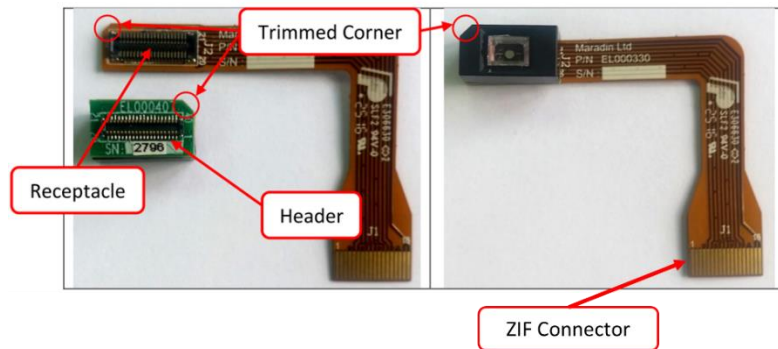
FPC connector to attach the MEMS micromirror to the control board and proper assembly. The trimming is essential due to the symmetry of the electrical connector that theoretically accepts two assembly configurations with a 180° rotation (adapted from [198]).
